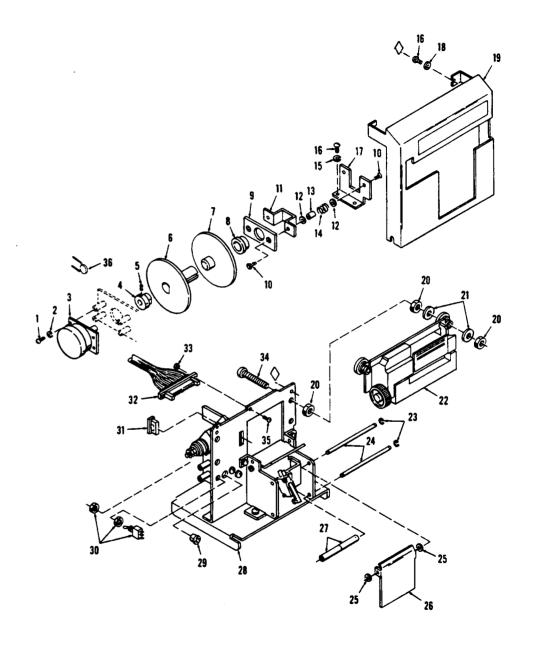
PRINTER FRAME ASSEMBLY (Part 1 of 2).
